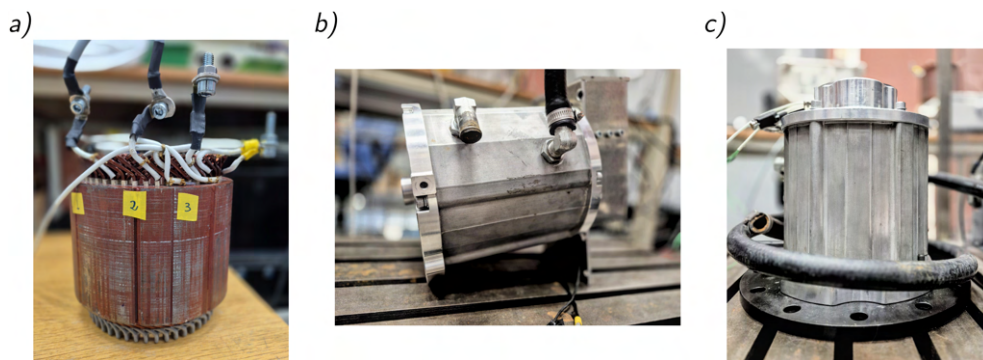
Used machines for the test (a) 360V 60 kW EM Stator (b) 360V 60 kW PMSM (c) 360V 60kW EESM
